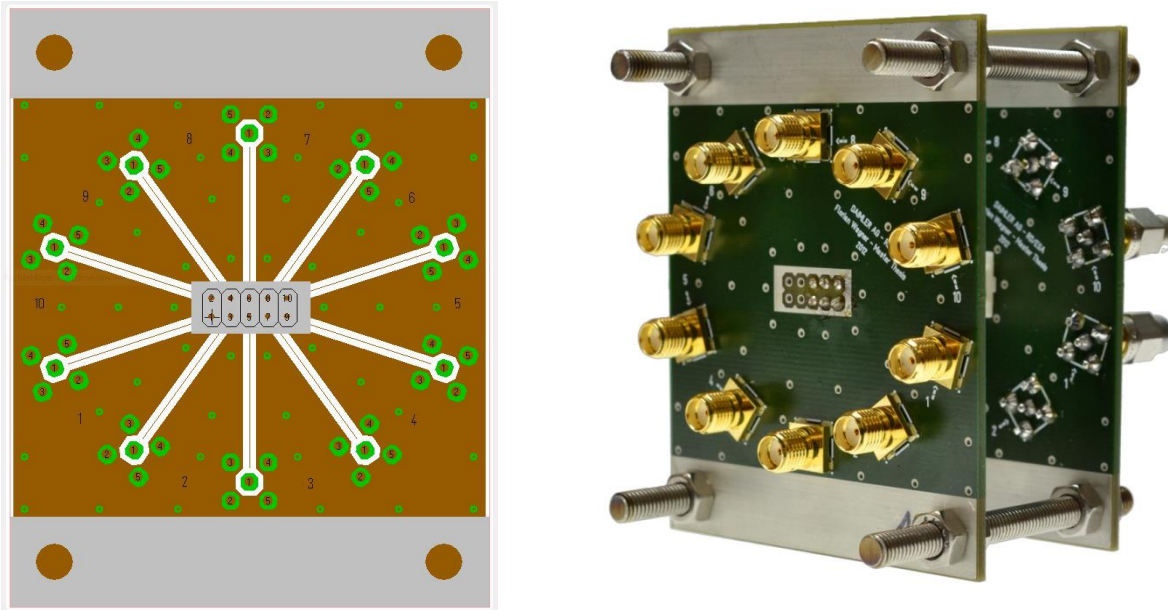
Example for test fixture for connector evaluation, left top layer, right 3-D picture of connector and two test fixtures
